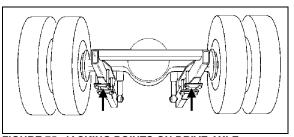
JACKING POINTS ON DRIVE AXLE OEH3B762
